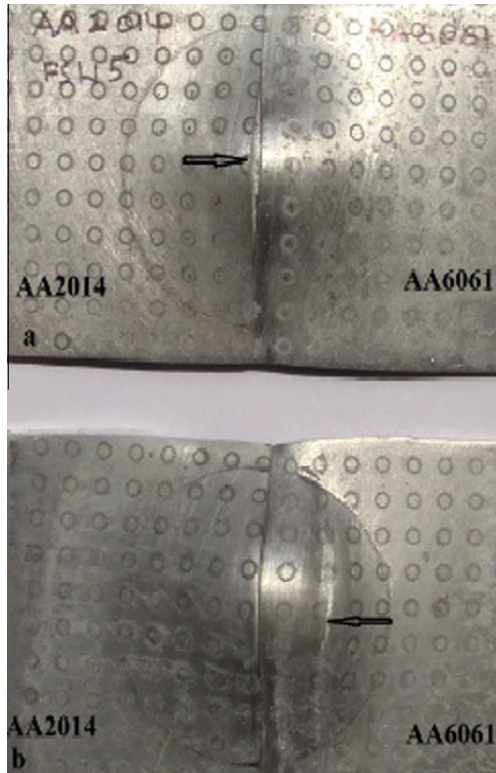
The tailer welded blank that is formed (a) non heat treated and (b) heat treated.
